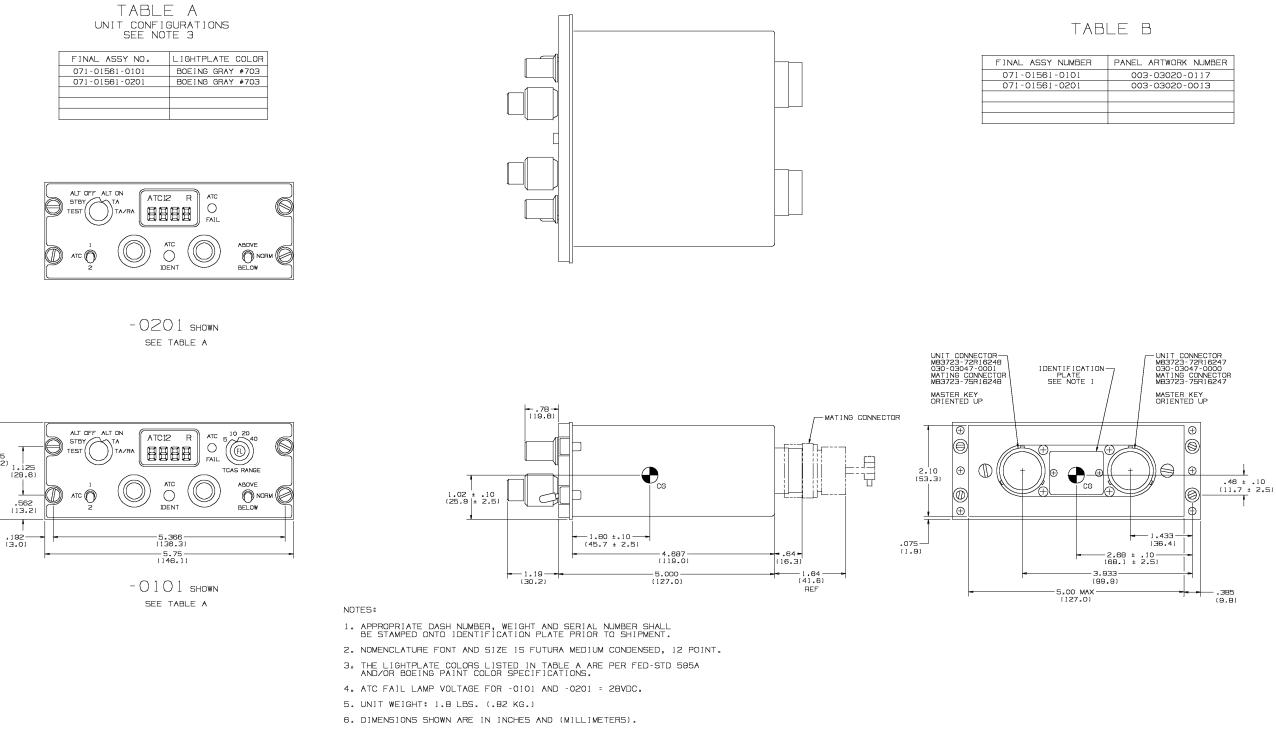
CTA-81D Mode S/TCAS Control Unit Outline and Mounting Drawing (Dwg. No. 155-06009-0000, Rev 0)
